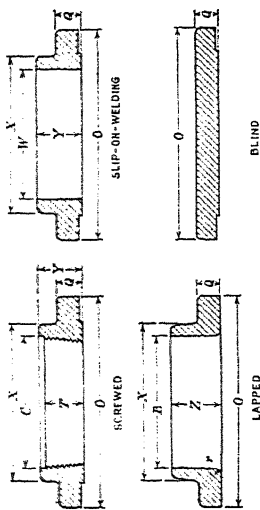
Typical flange facings (see Table CX, p. 637, for dimensions).
